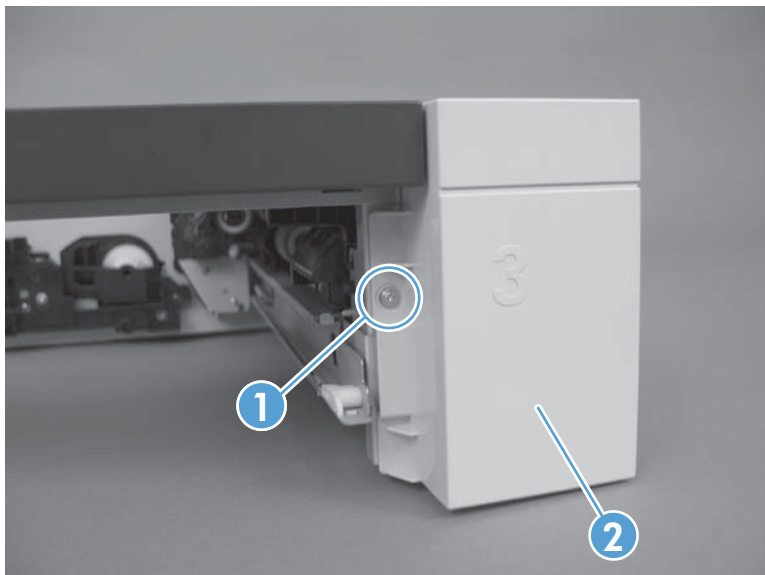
Remove the rear cover (500-sheet paper feeder)
